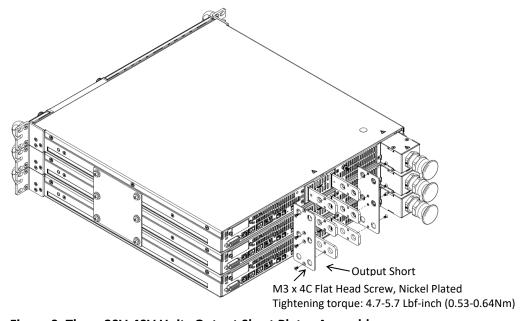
Three 20V-40V Units Output Short Plates Assembly
